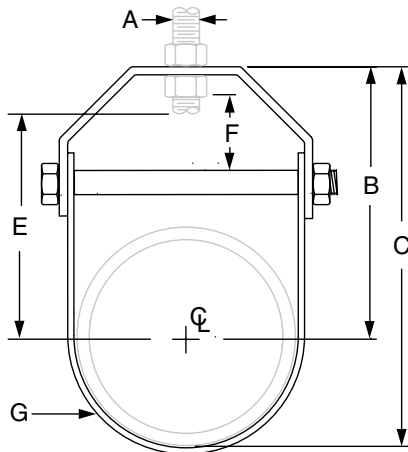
LOADS (LBS) • WEIGHT (LBS) • DIMENSIONS (IN)
